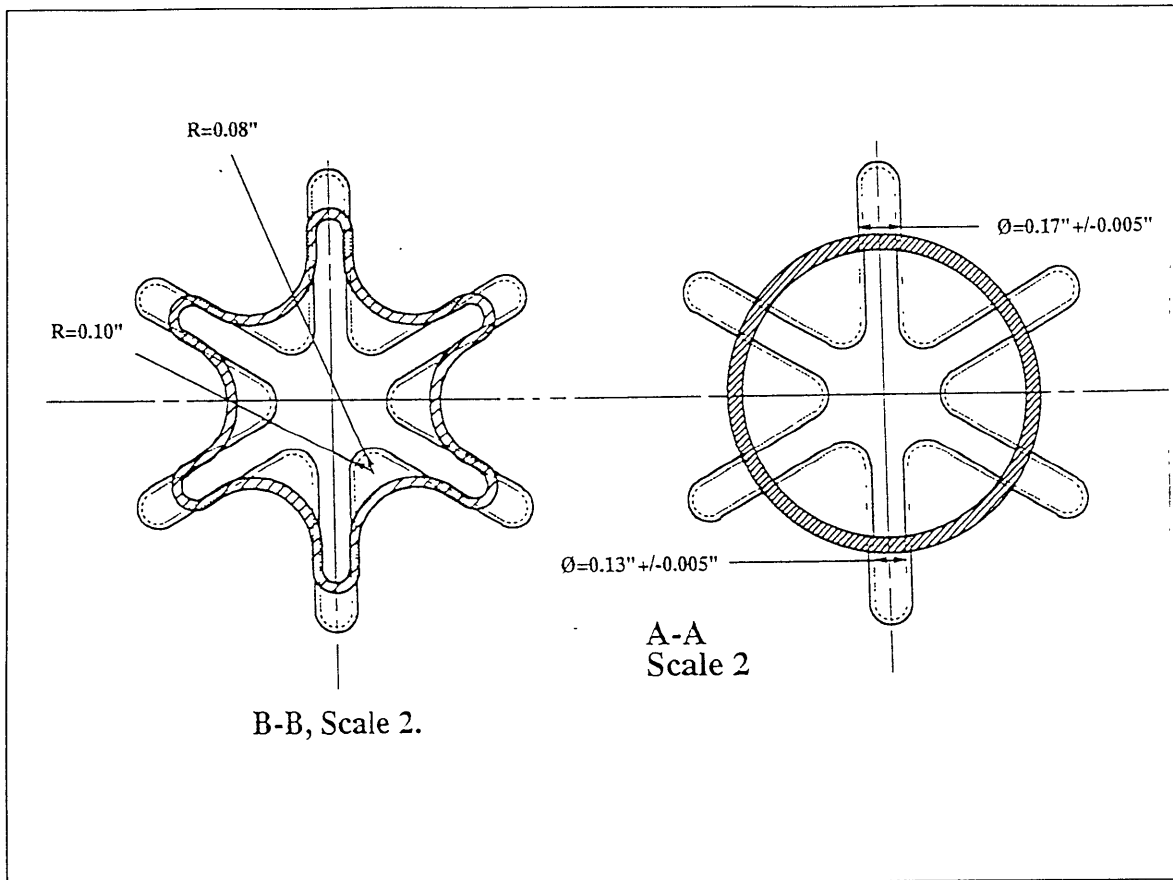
LOBED MIXER, CROSS SECTIONS
